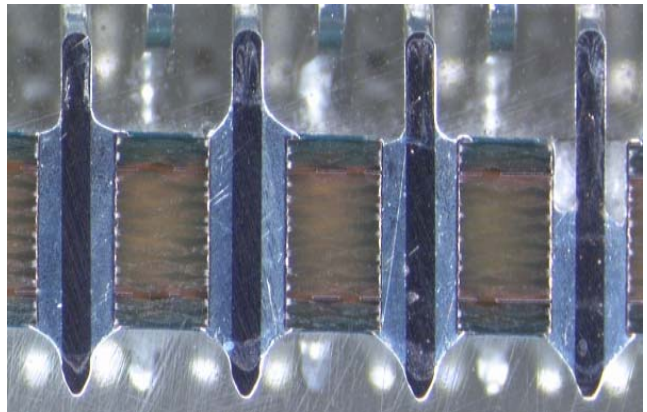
B. PCI Lead Protrusion on the 93 mil Thick Card.
